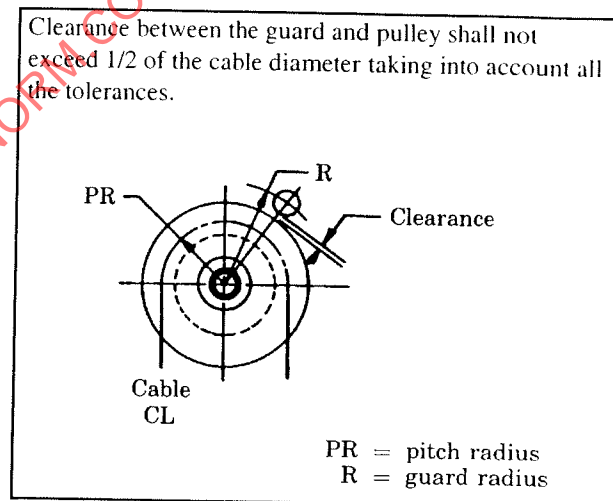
PULLEY TO GUARD CLEARANCE
